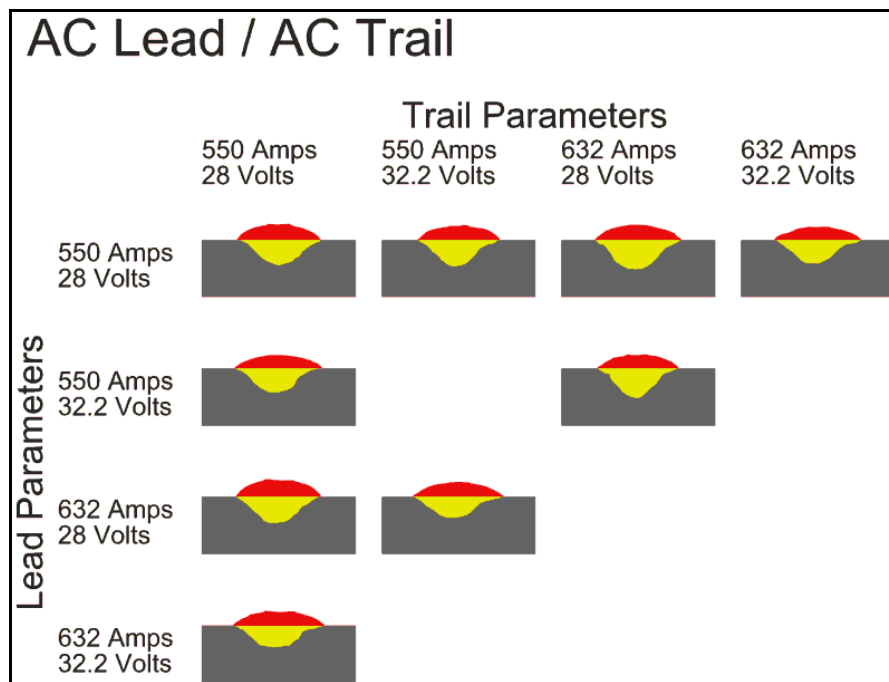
Group 2 AC-SQ Lead and Trail Tandem Weld Bead Cross-Sections
